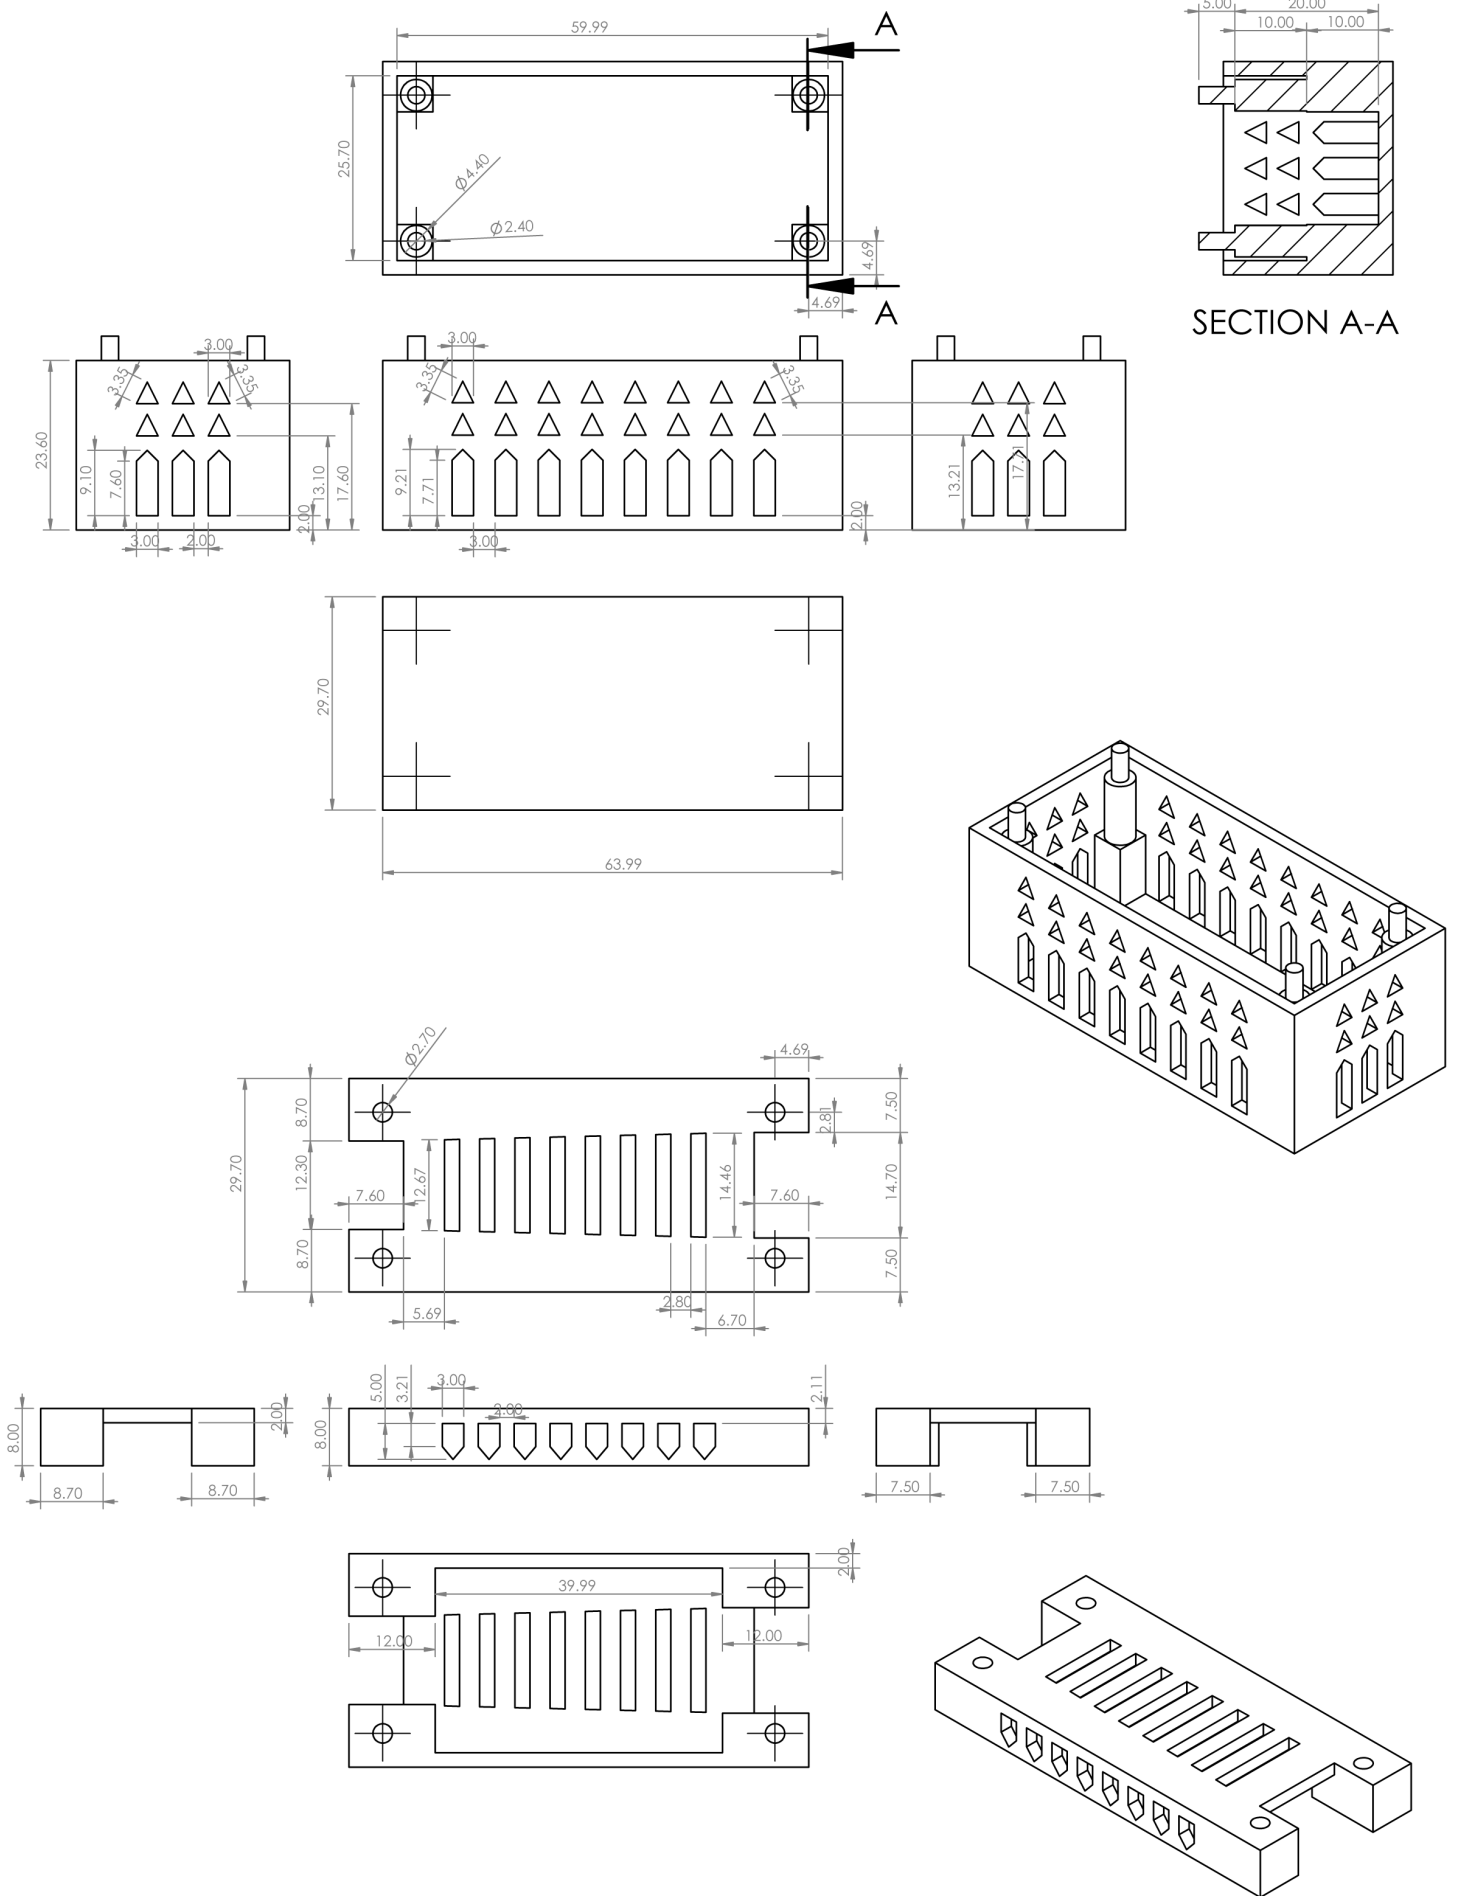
Part drawing for both parts that make up the amplifier encasing
